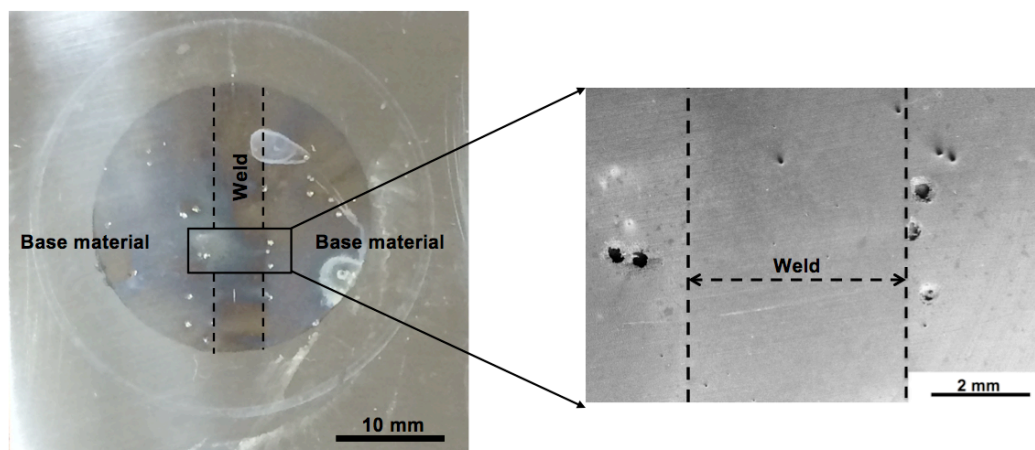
Pitting corrosion on alloy 825 weldment
